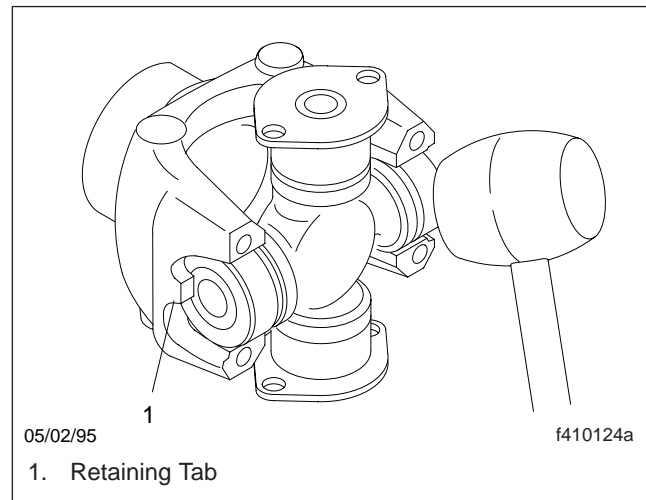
, Seat a U-Joint in a Half-Round End-Yoke
